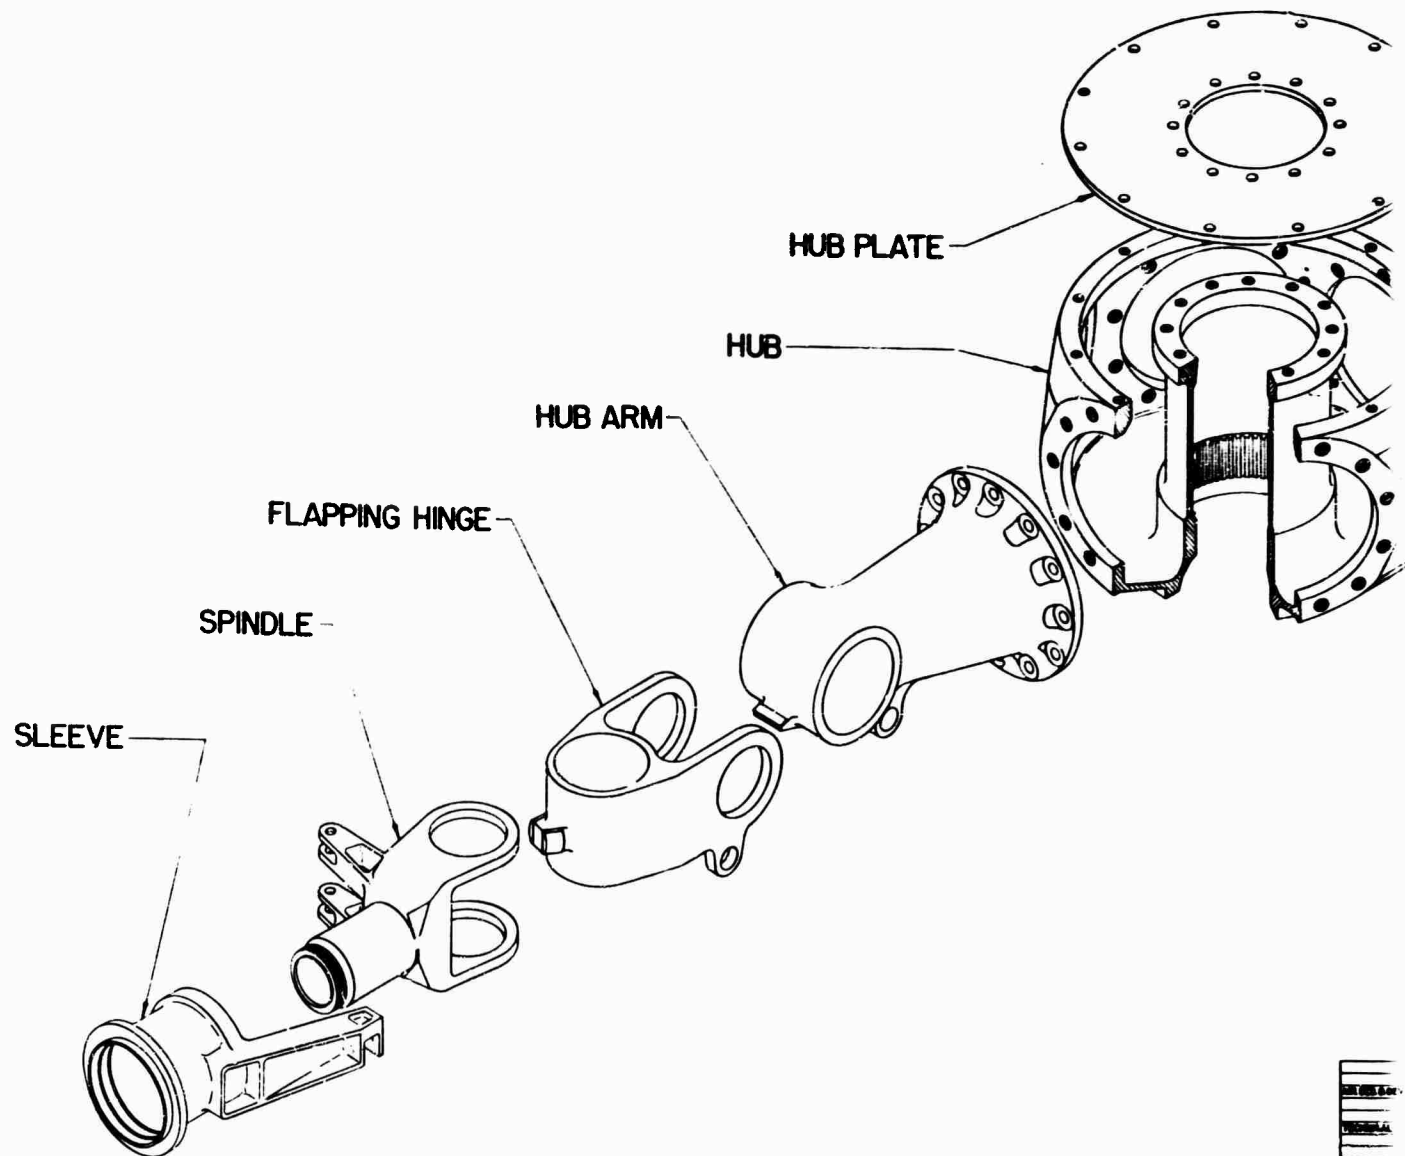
Alternate Hub Assembly, Flex-Rotor™ Head,
